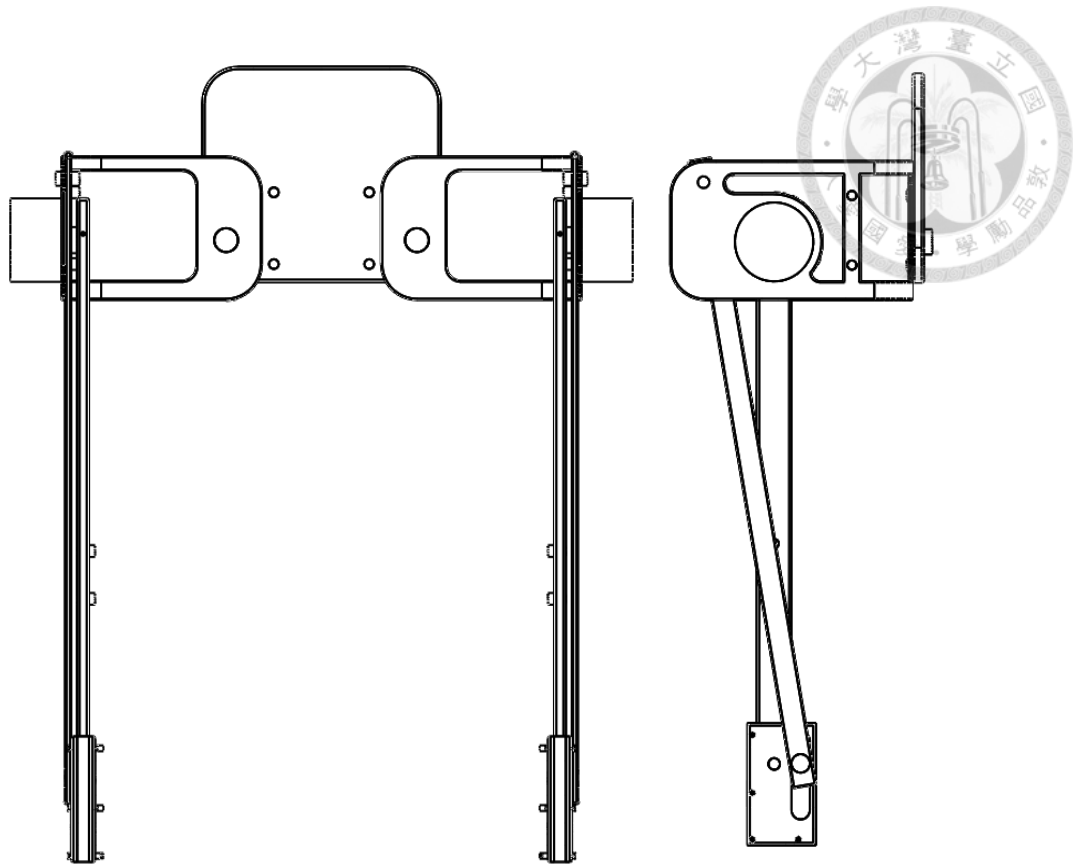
Exoskeleton mechanism. The left inlet is the front view, and the right is the side view.
